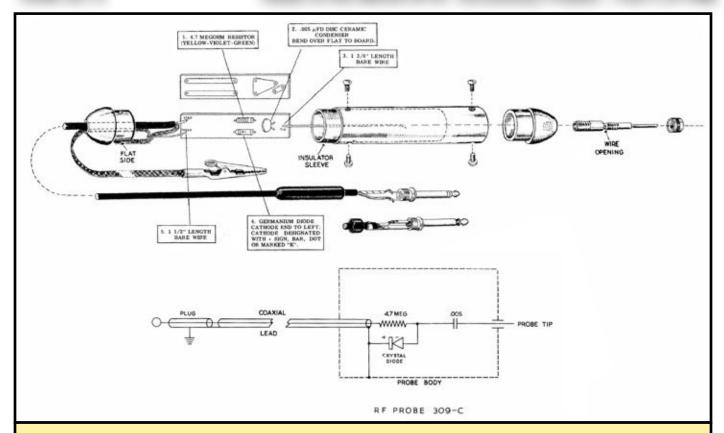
Schematic and assembly drawing of the #309C probe using the later "Red - Aluminum - Black "probe housing & PC board.
